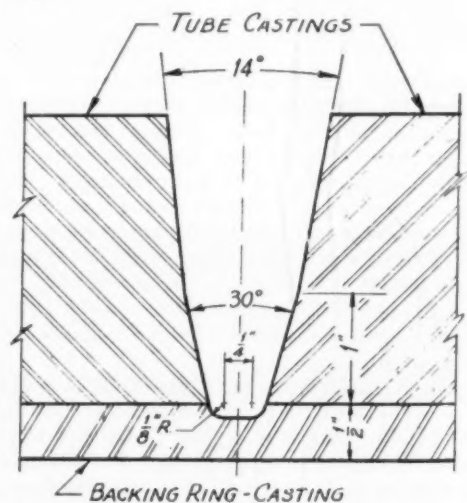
WELD DETAIL APPROVED BY NAVY DEPARTMENT, BUREAU OF SHIPS
